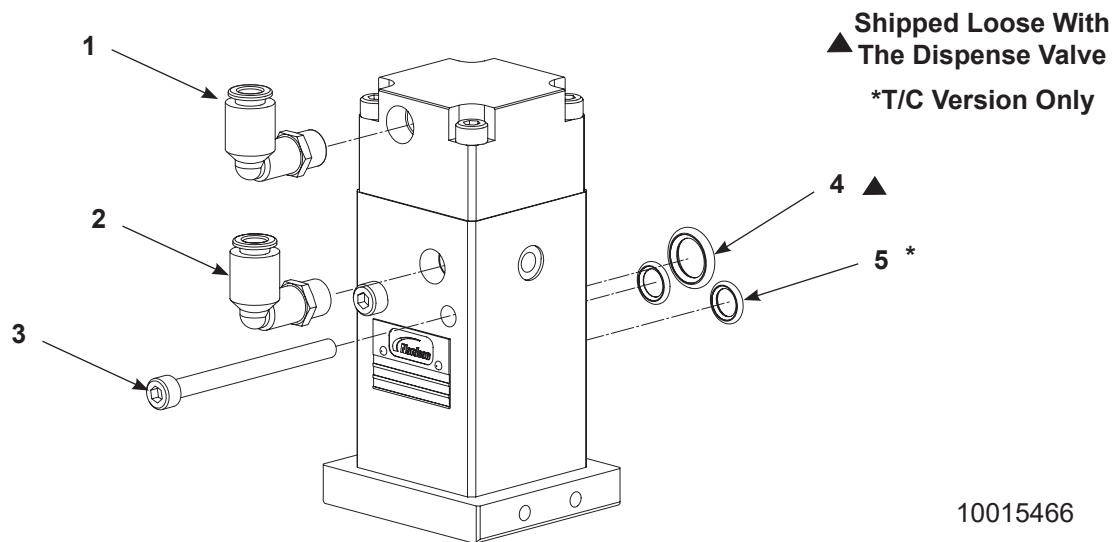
Manifold Mount Dispense Valve (Temperature Conditioned Dispense Valve Shown)
